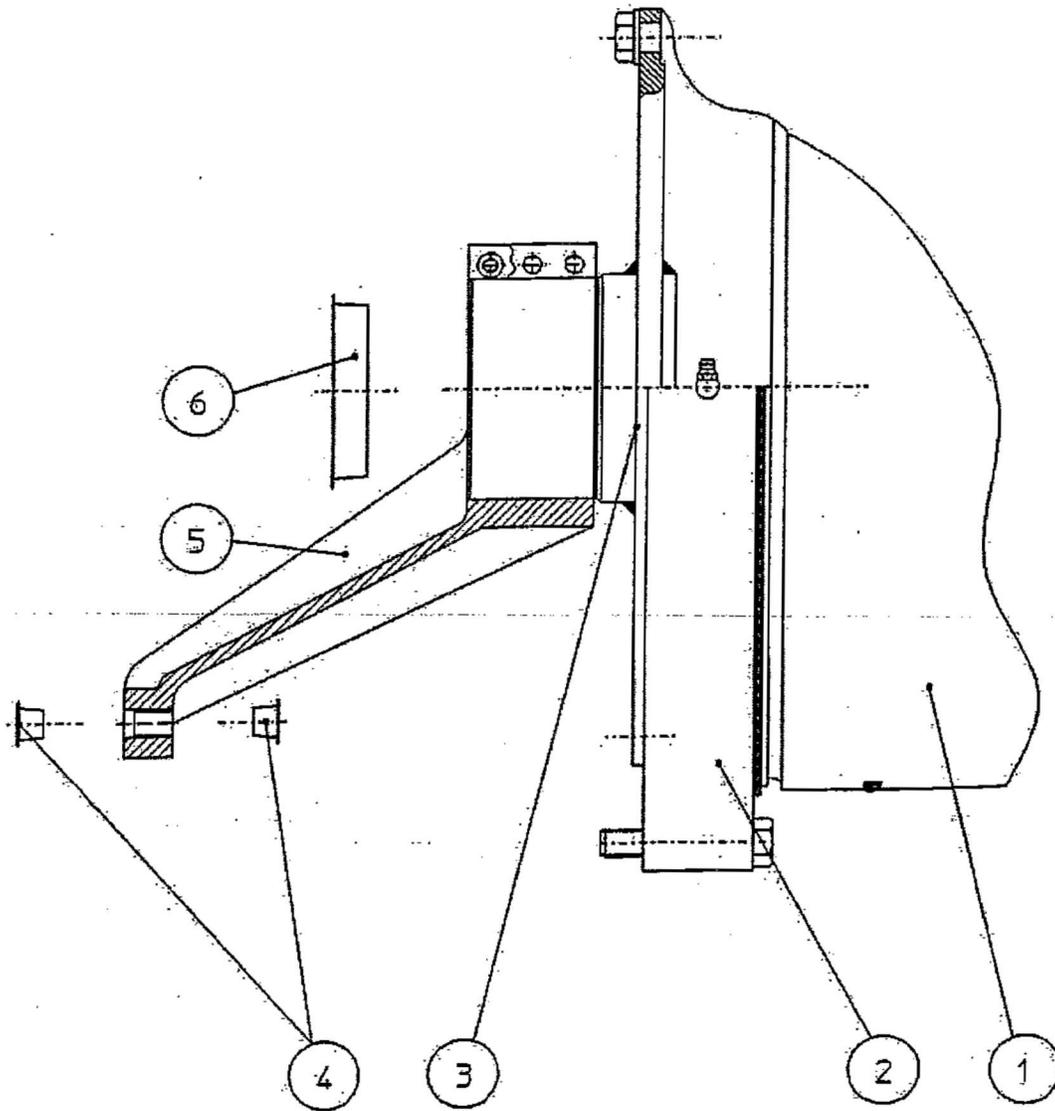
Spare parts drawing 1 of 4, blade mounting
